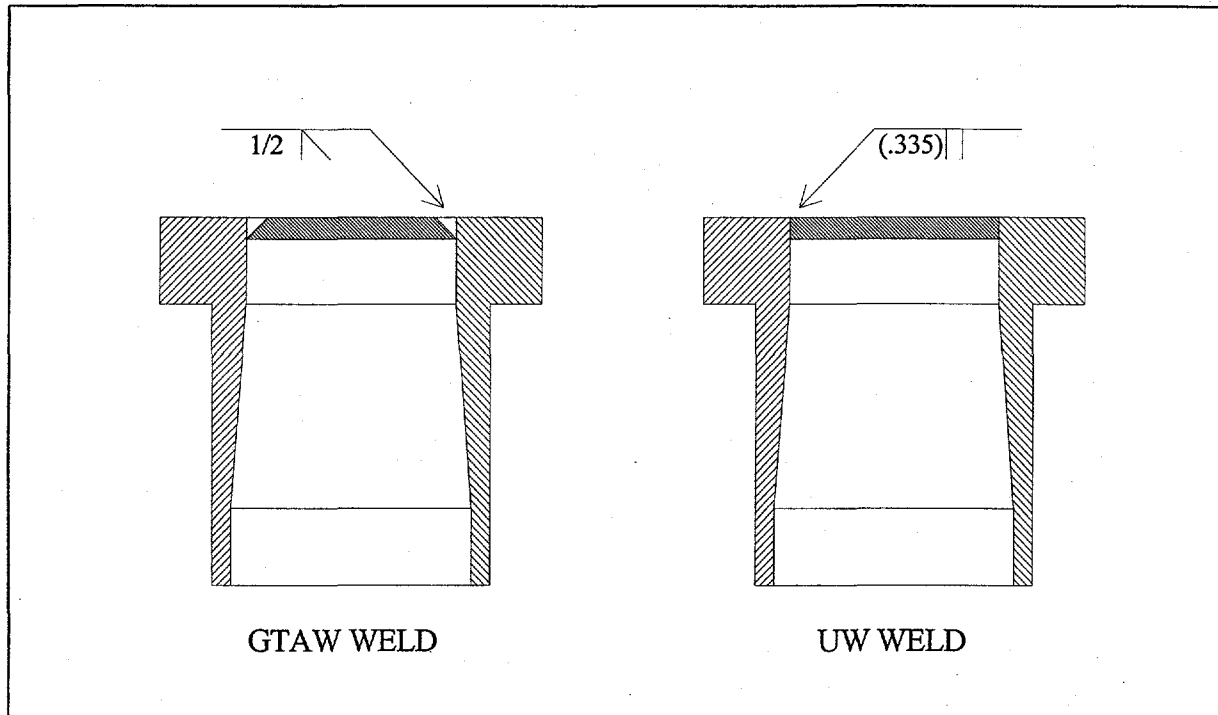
WELD JOINT DETAIL OF THE GTAW AND UW CLOSURES
